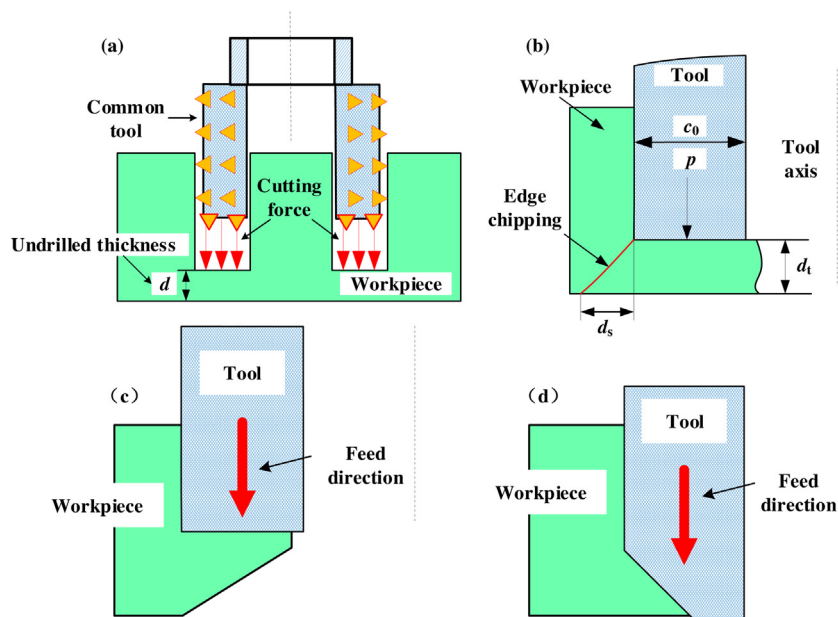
Edge chipping formation. (a) Illustration of undrilled thickness using a common diamond core tool. (b) Relationship between edge chipping thickness and cutting force. (c) and (d) Two types of wedge-type contact structures between the tool and workpiece.
